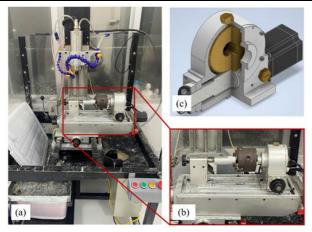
CNC milling machine after upgraded; a) CNC machine frame; b) A-axis; c) A-axis transmission
